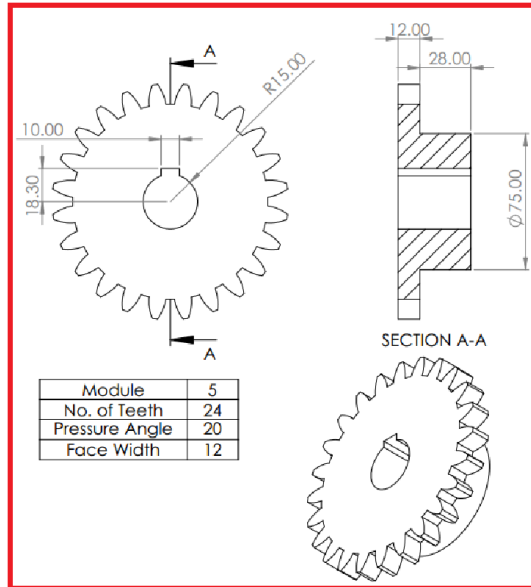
Planet\_Coupler Geometry and Dimensions (mm)
